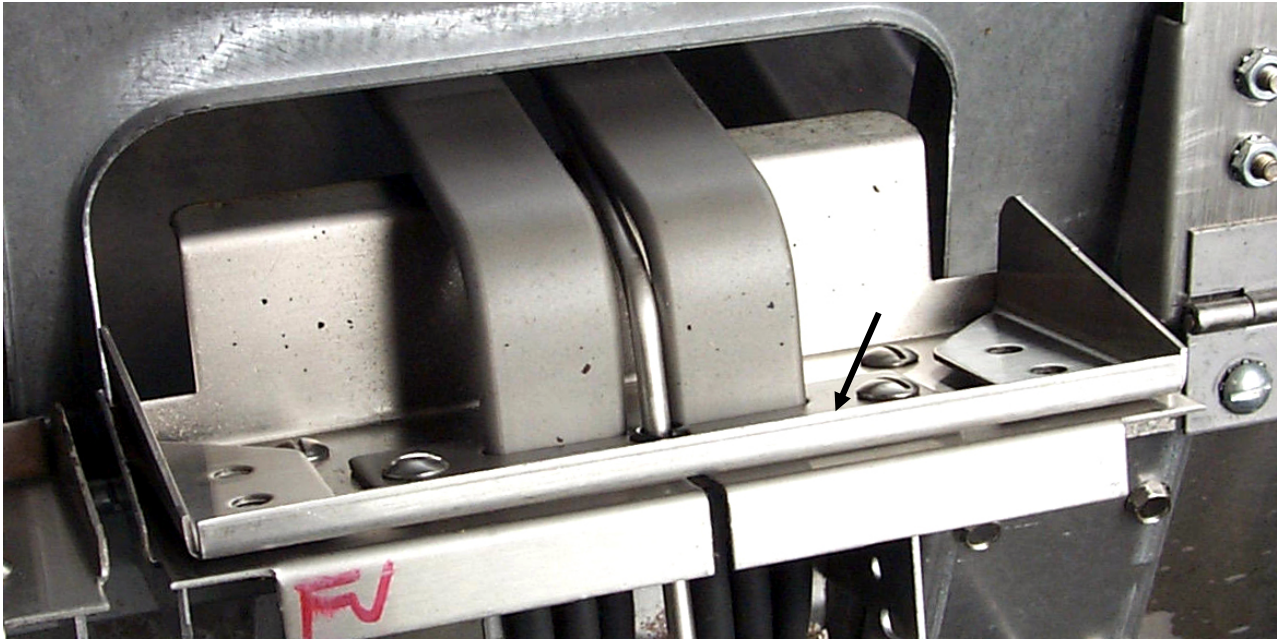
Attach the provided shroud (shown above) to the tilt assembly if the top edge it provides (see arrow) is absent from the existing assembly. See also Figure 2.
